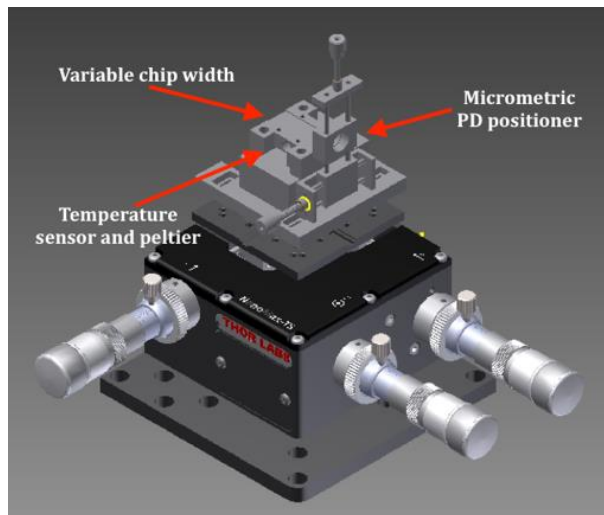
Overview of the mechanical assembly of the mechanical holder and photodiode micrometric positioner.
